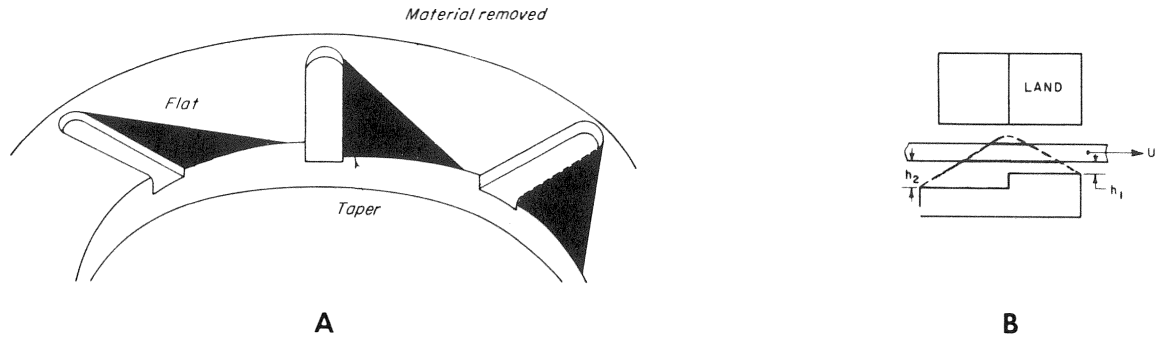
(a) Tapered Land Bearing; (b) Step Bearing.
